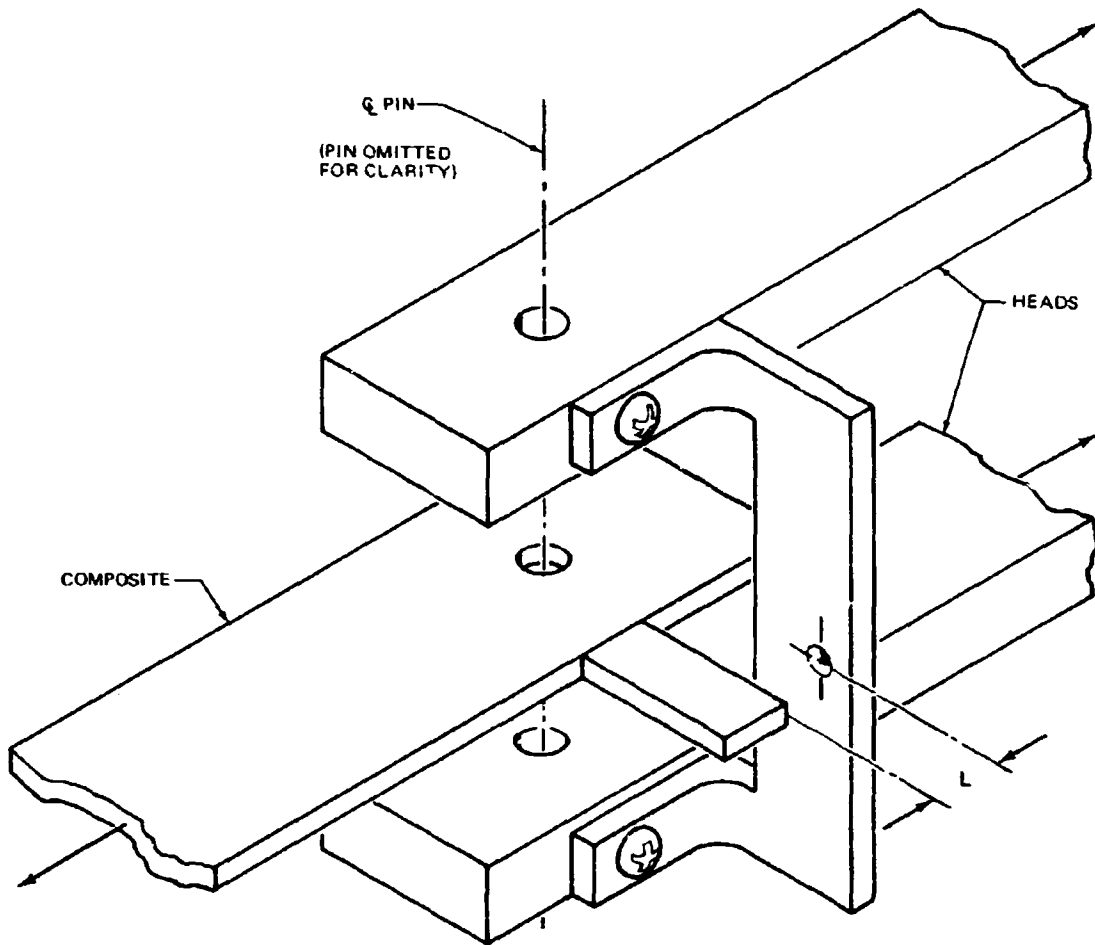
SCHEMATIC OF TEST FIXTURE FOR PIN-BEARING TESTS
